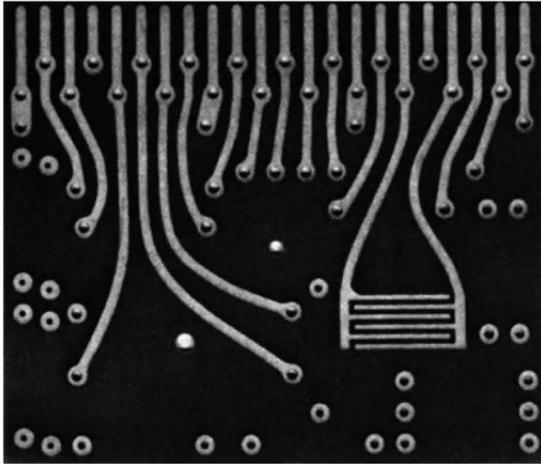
Plug-in circuit with printed capacitor. Courtesy Photocircuits Corp.
